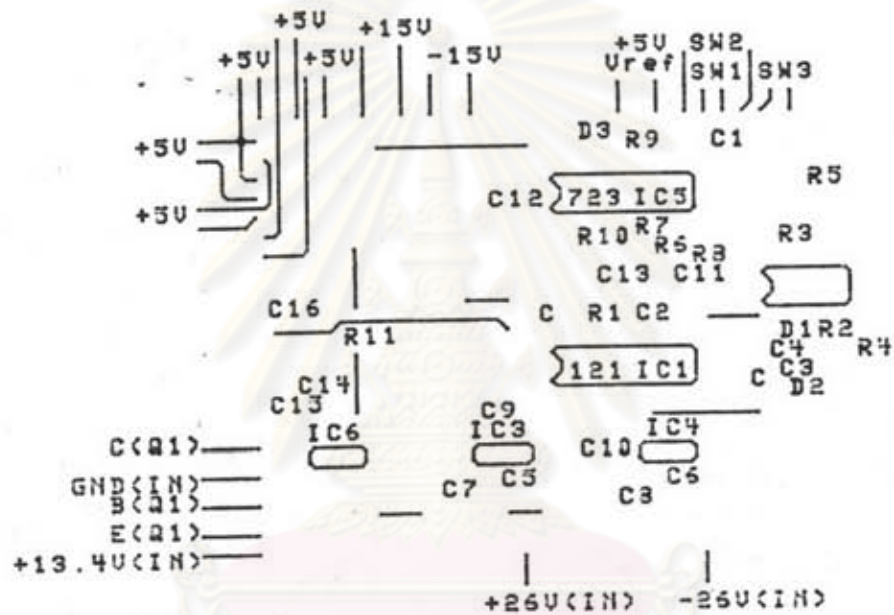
The component layout of the printed circuit board of the power supply and the internal clock for PSP.
